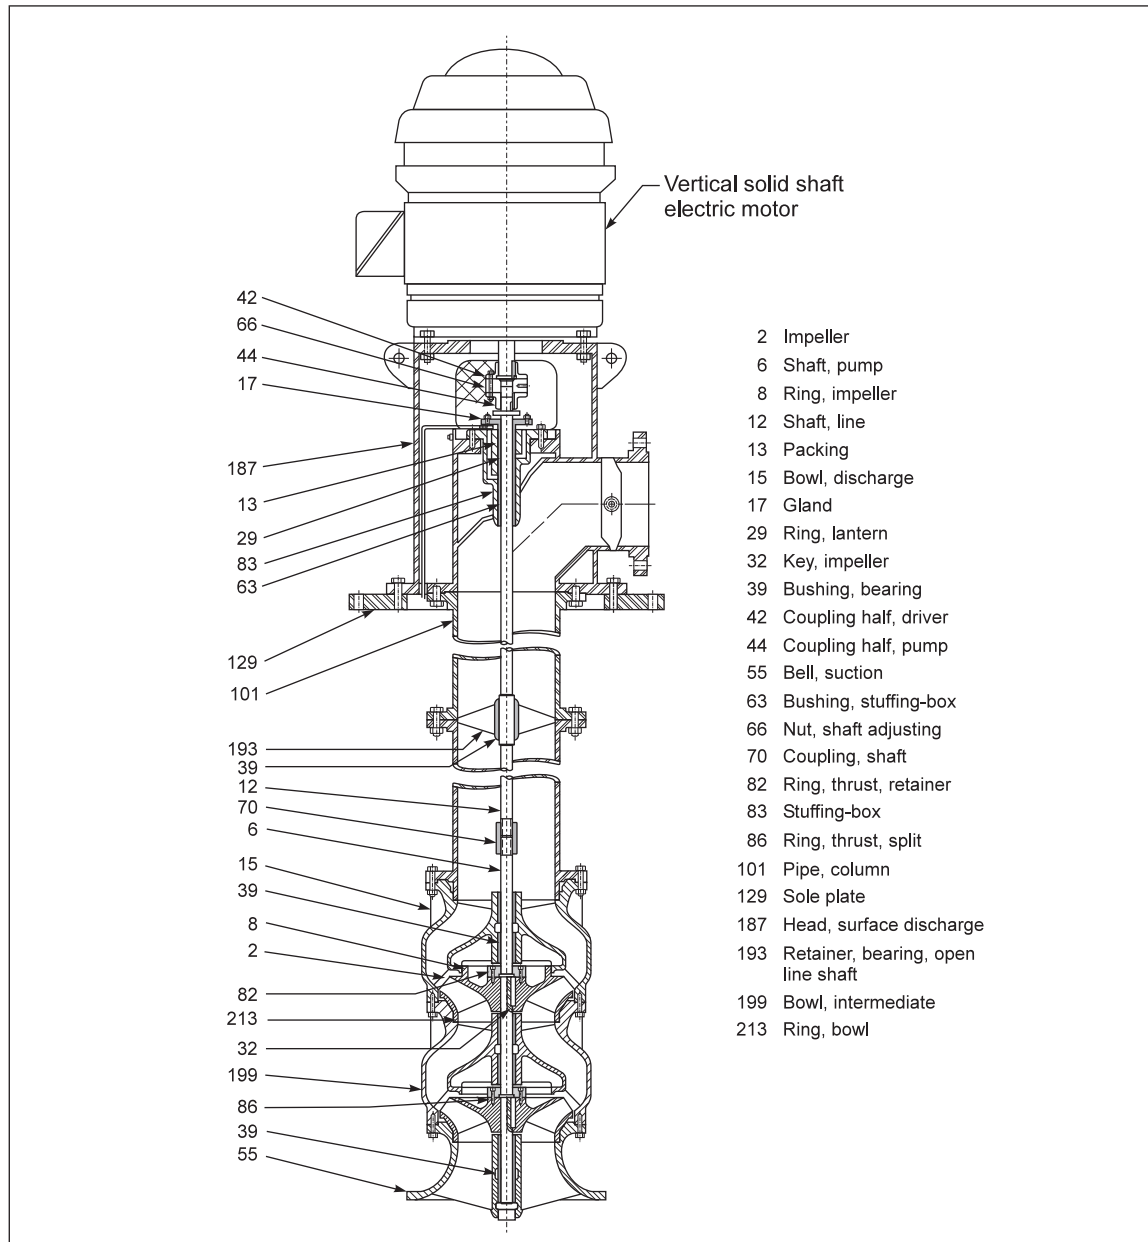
A cutaway drawing of a typical two stage vertical turbine pump
